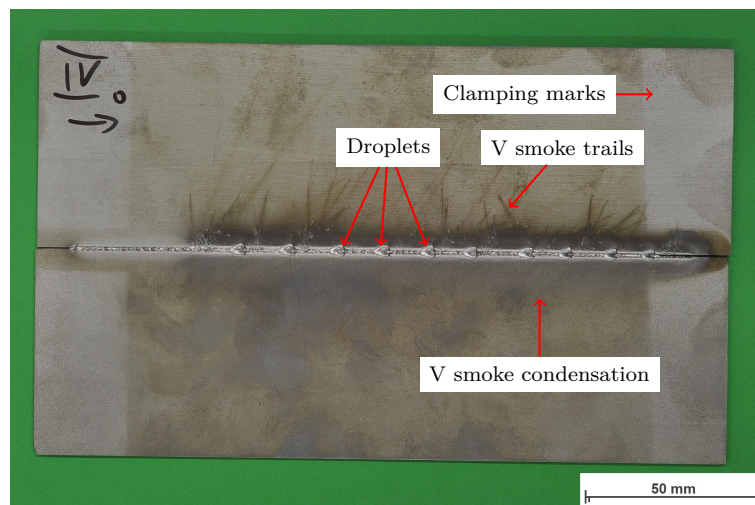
Macroscopic top view of preliminary EB weld of TZM sheets with V filler metal
